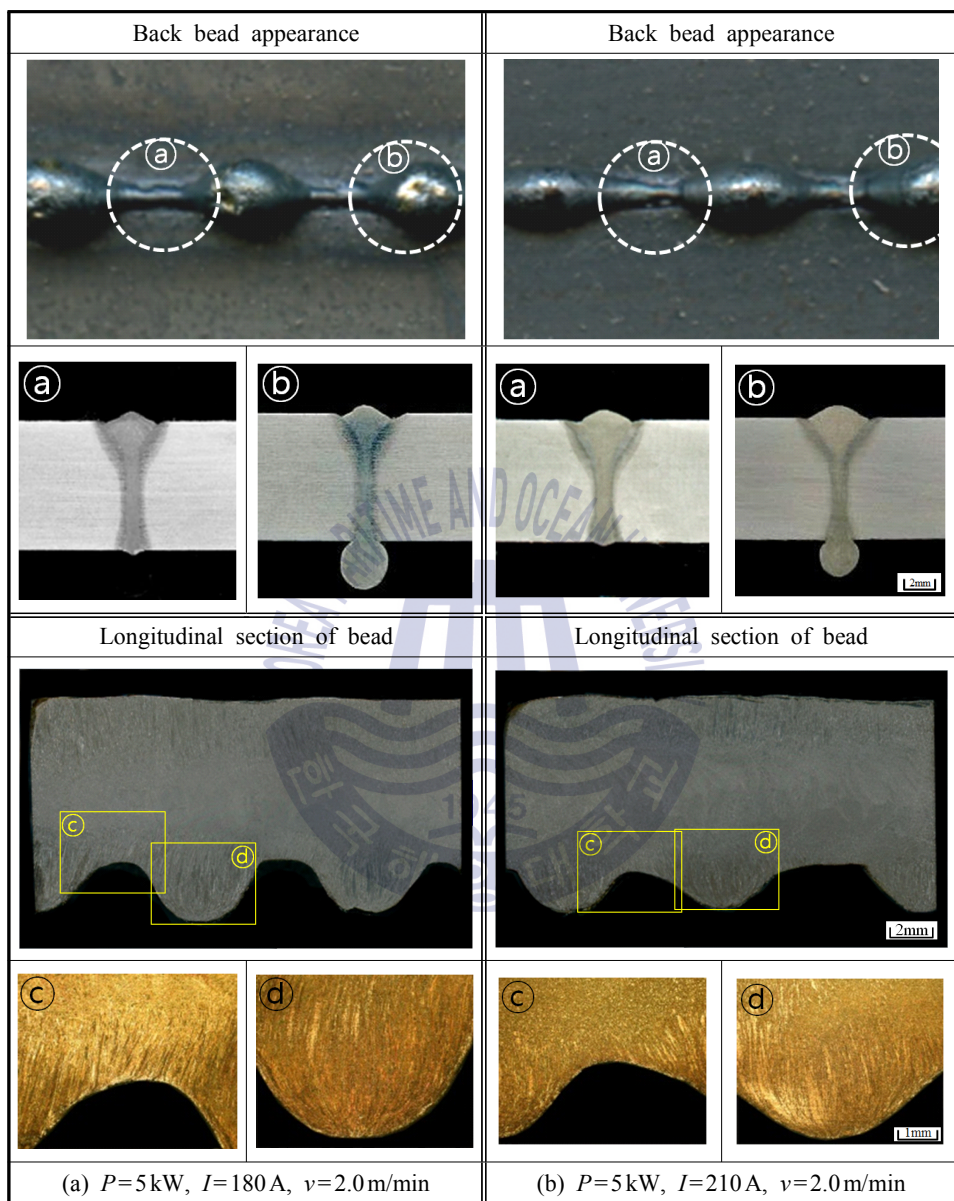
Appearances of humping bead in hybrid welding($P=5\text{ kW}$)
